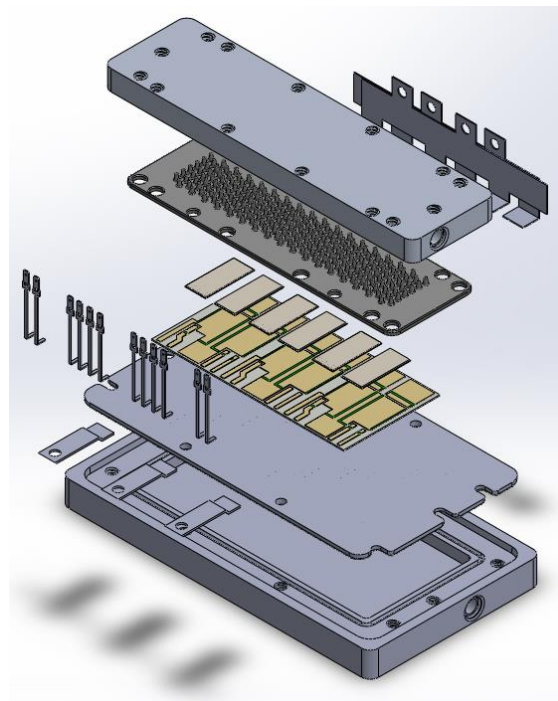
Packaging process of the double side cooling power inverter prototype.
